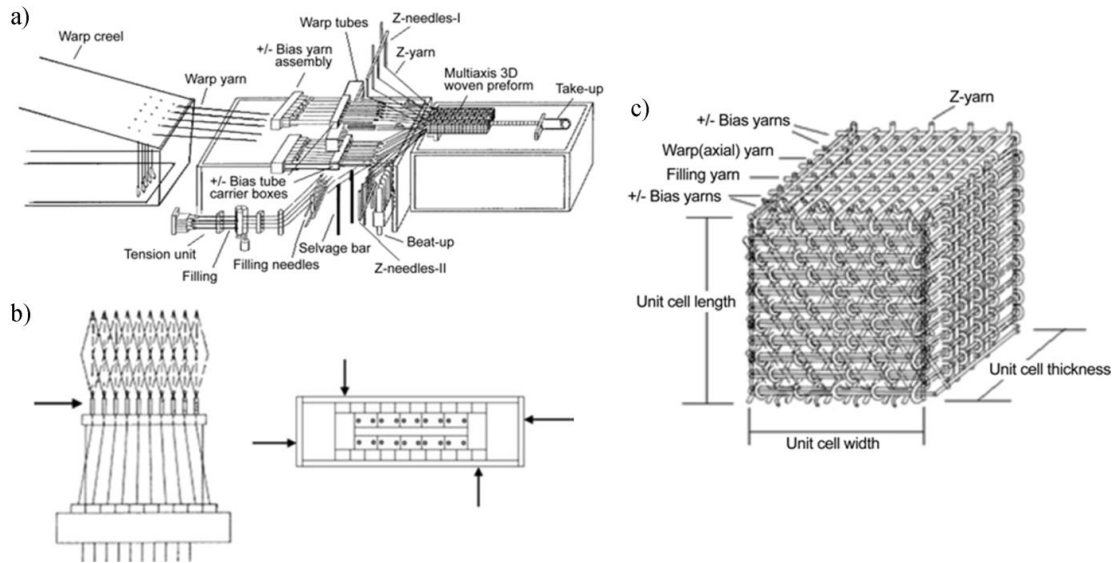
Tube carrier weaving method; a) scheme of developed multiaxis 3D weaving machine, b) representation of circular moving of each assembly of tube carrier for one bias yarns layer, c) a unit cell of produced fabric illustrating of edge to edge path of bias yarns across fabric width, (Bilisik 1995, 2010).
